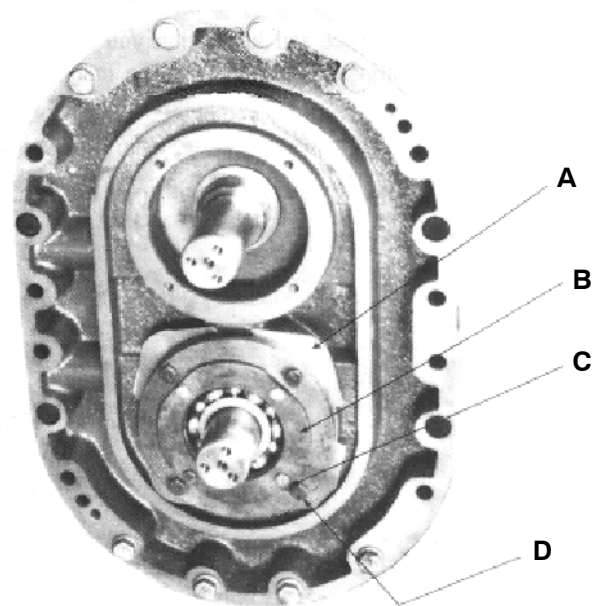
BEARING CARTRIDGE REMOVAL
